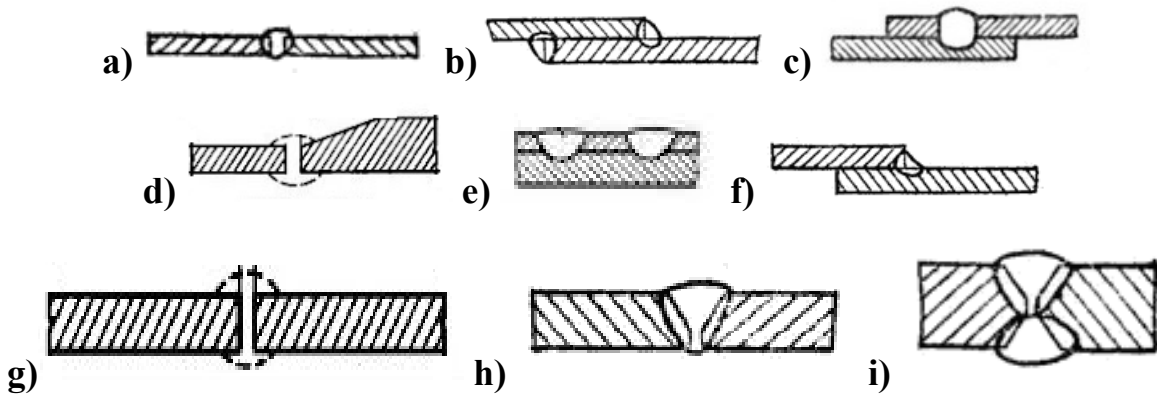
The main types of welded joints used in the automotive industry [3].
